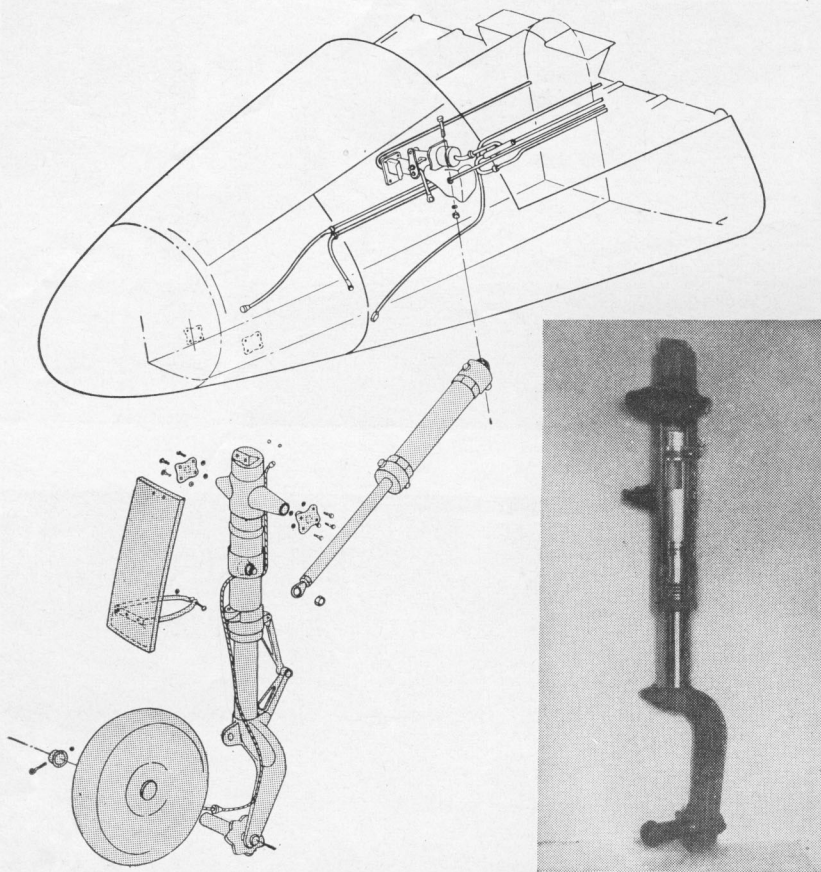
Phantom view of the installation of the nose landing wheel, which is depicted in the exploded view. The inset is a cutaway of the nose-wheel strut. Note that the original plans called for conventional torque scissors; however, late model ME-262's had built-in shimmy dampers.
